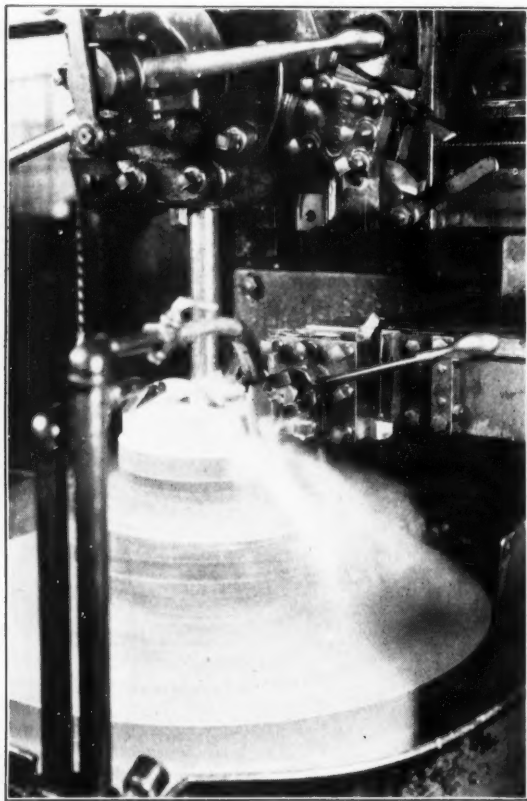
Close-up view of a Fellows high speed gear shaper, showing the machine in operation with the cutting fluid flowing over the work and cutter.
